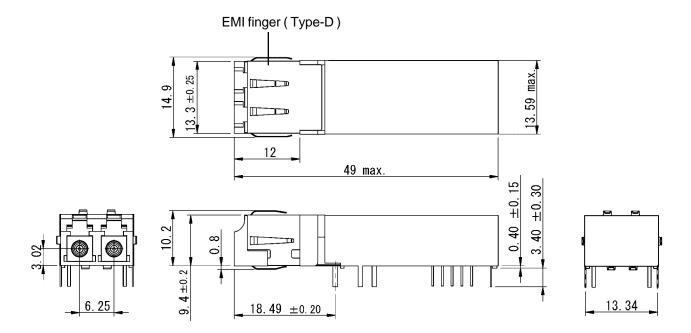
Outline Dimensions (SCM6211-GL-Z#)
